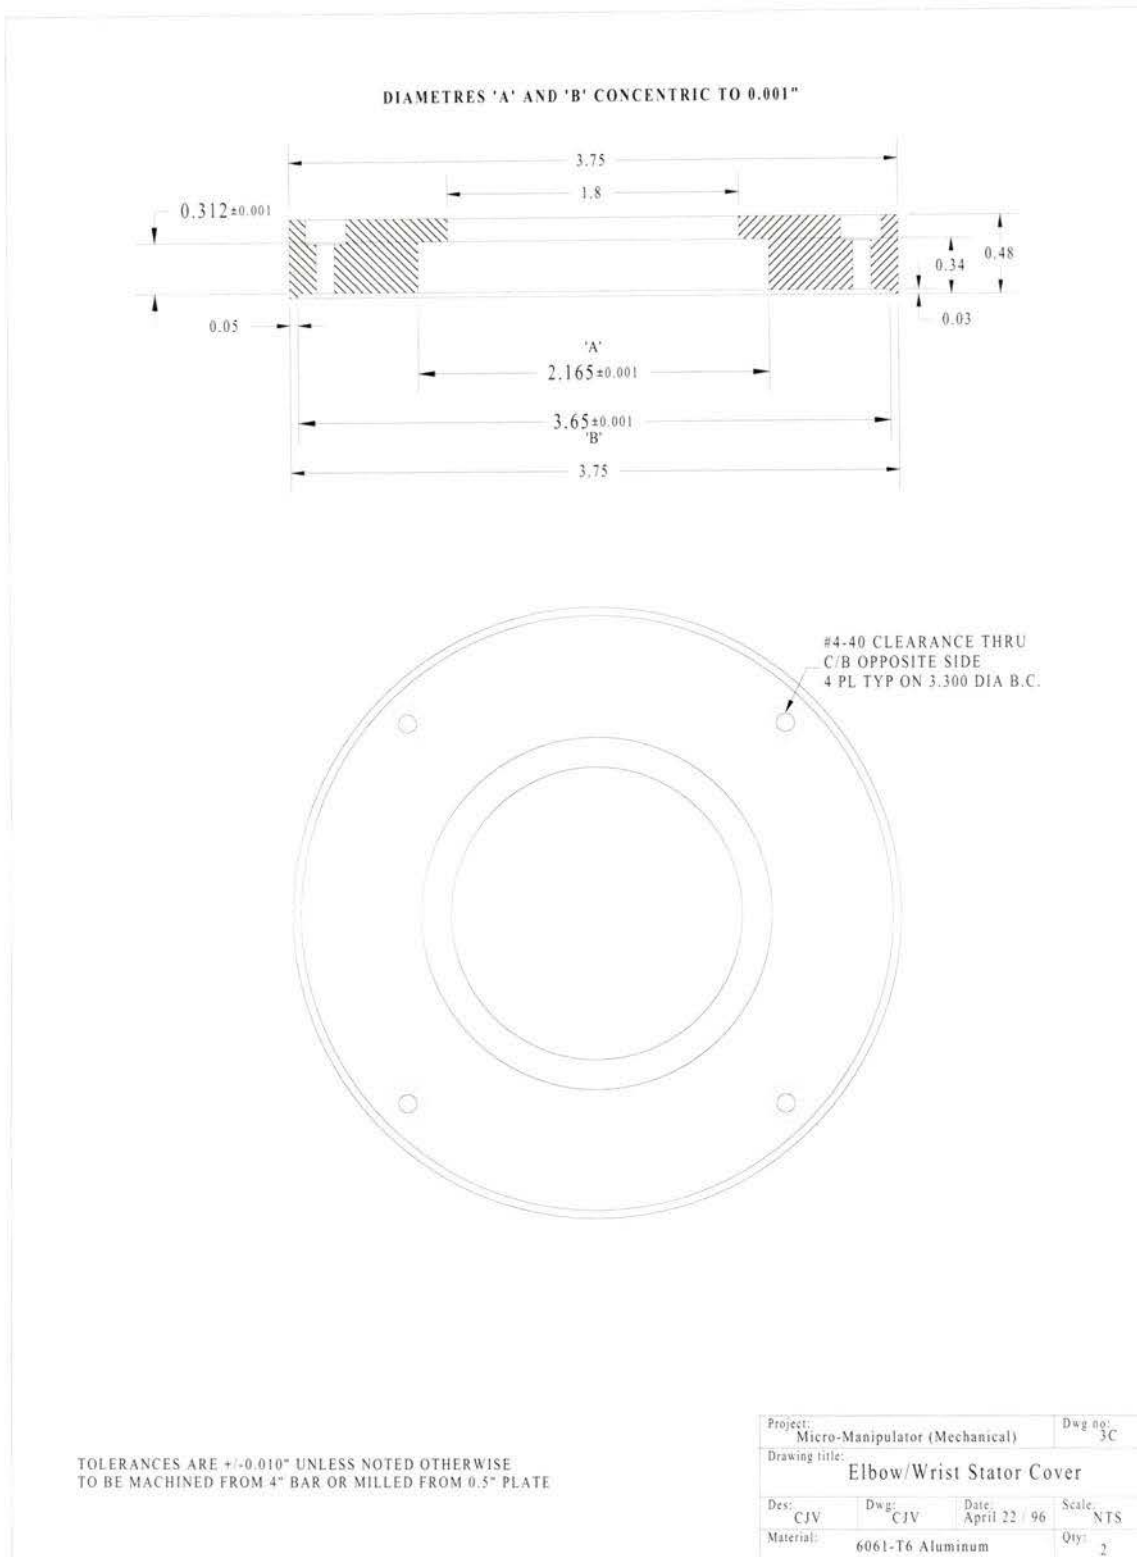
SARA Elbow/Wrist Joint: Stator Housing Cover
